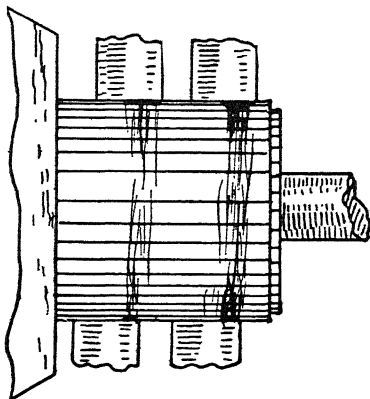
Rough and grooved commutator due to improper brush adjustment and failure to keep brushes in proper condition.
